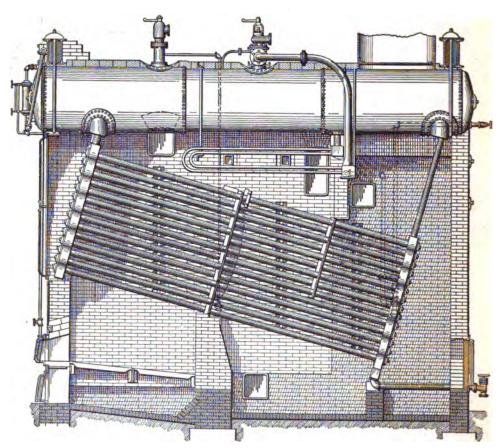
Wrought-Steel, Inclined Header, Longitudinal Drum Babcock & Wilcox Boiler, Equipped with Babcock & Wilcox Superheater.
